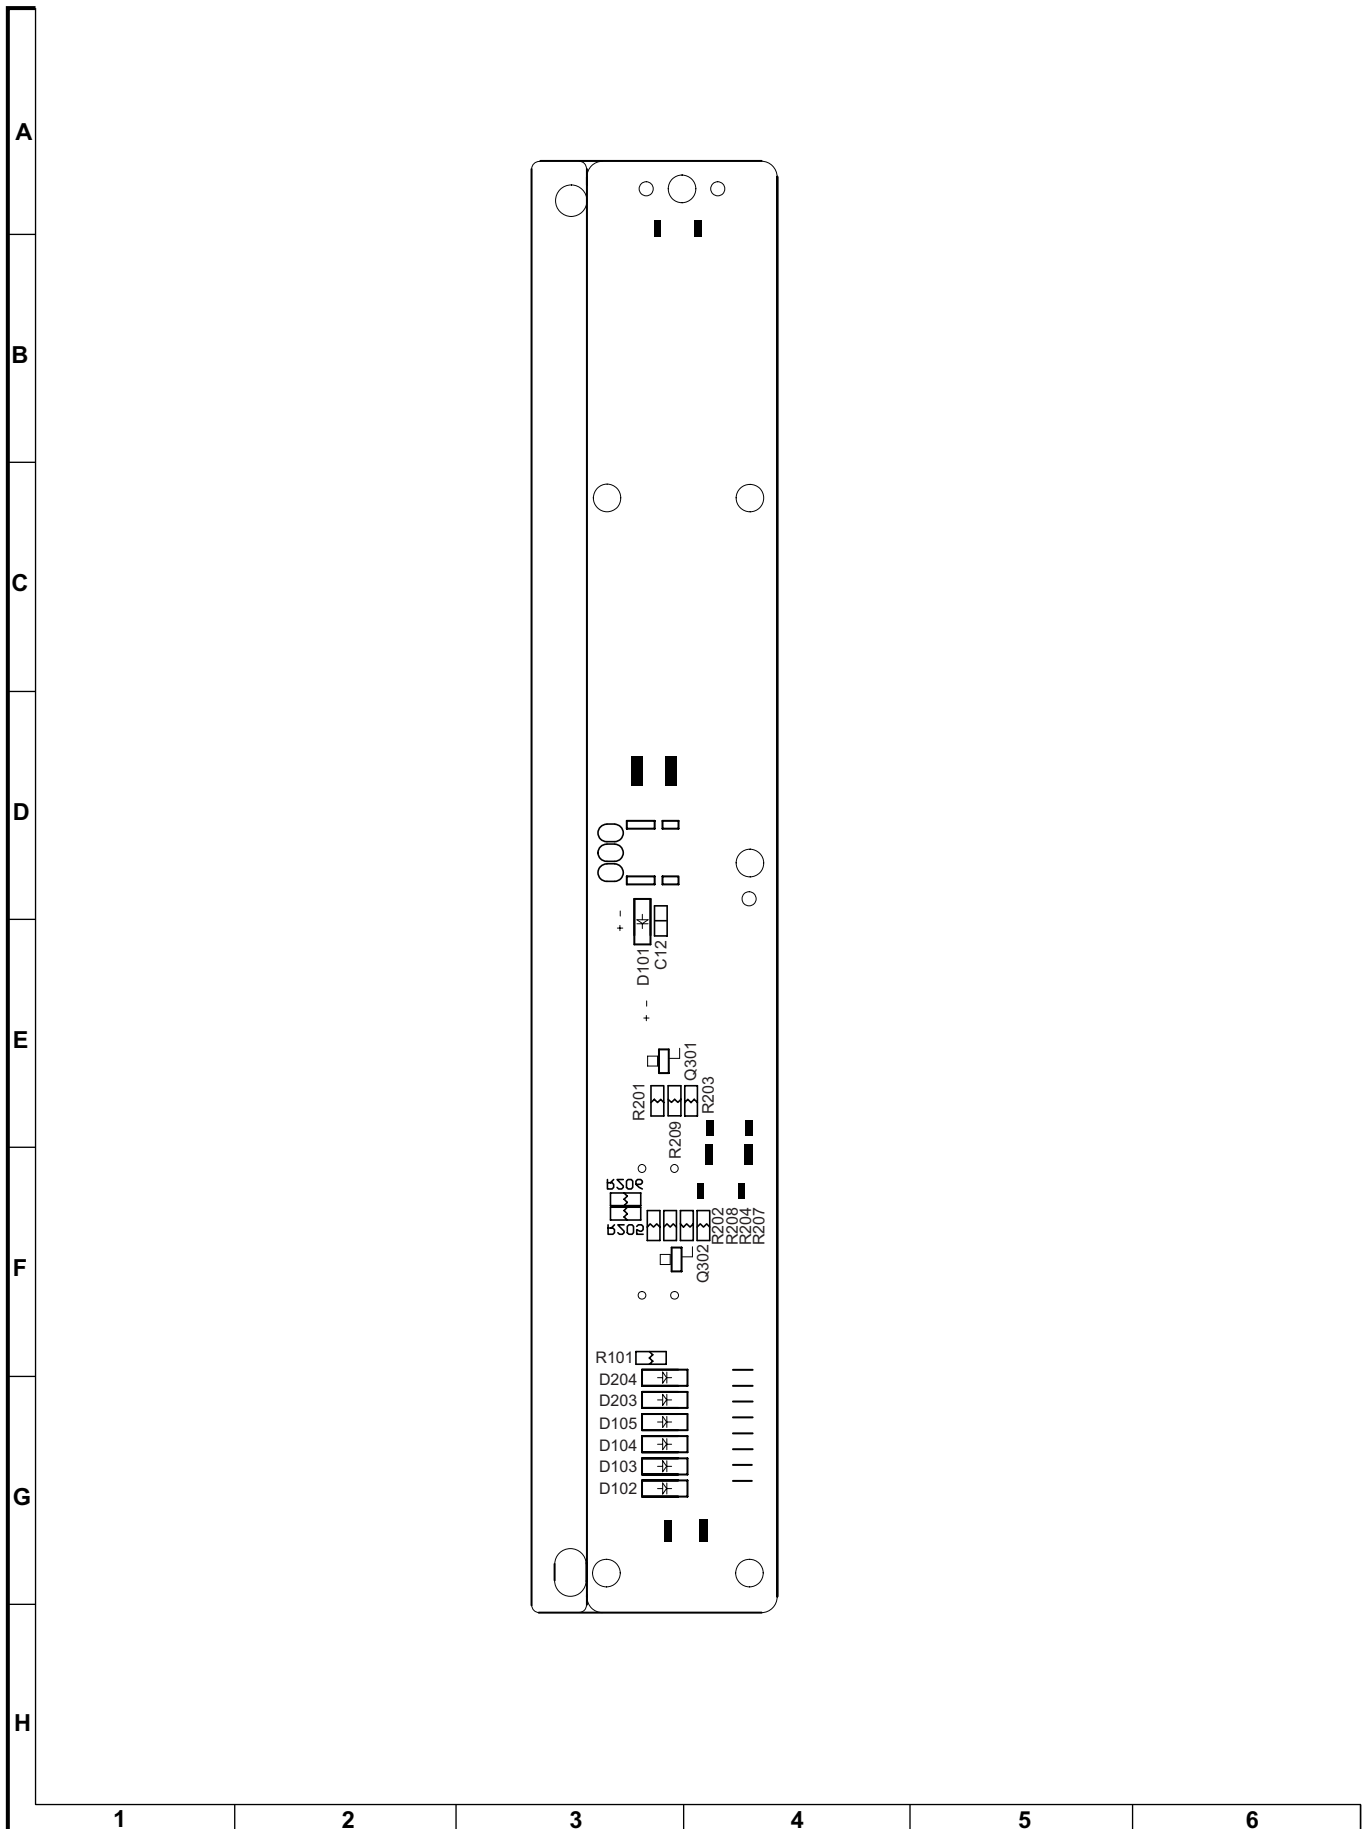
WIRING SIDE OF CONTROL PCB (BOTTOM VIEW) 1/2
